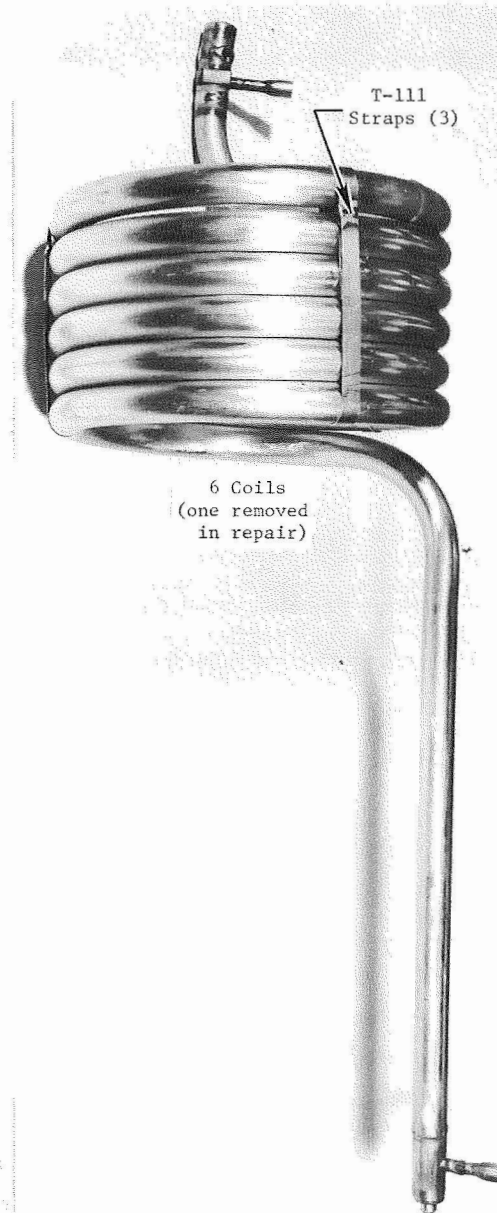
Bottom of the T-111 Boiler Following Repair Welding.
